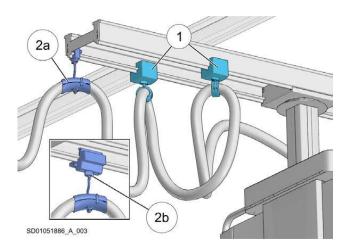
Movable hose carriers (1+2b) and fixed hose carriers (2a)
